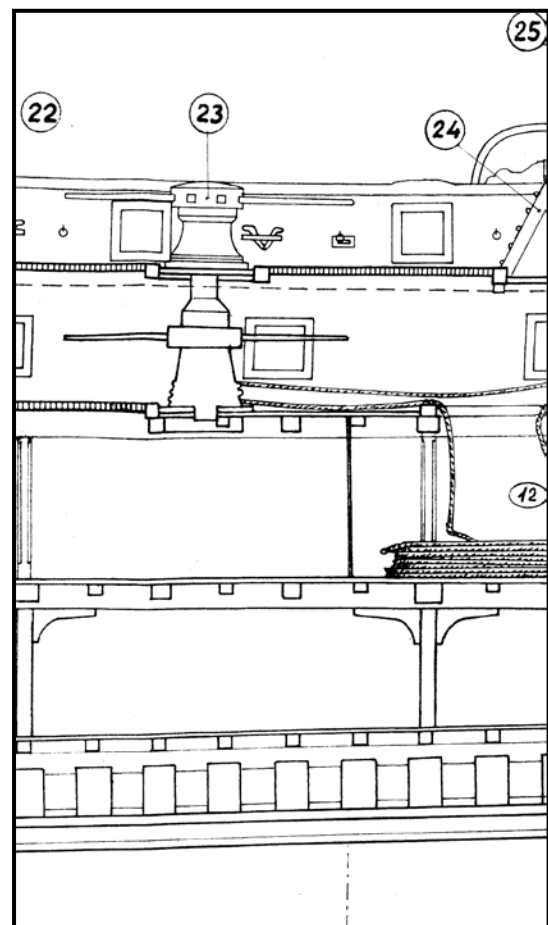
Vertical Cross-sectional View from Plan Sheet 2
